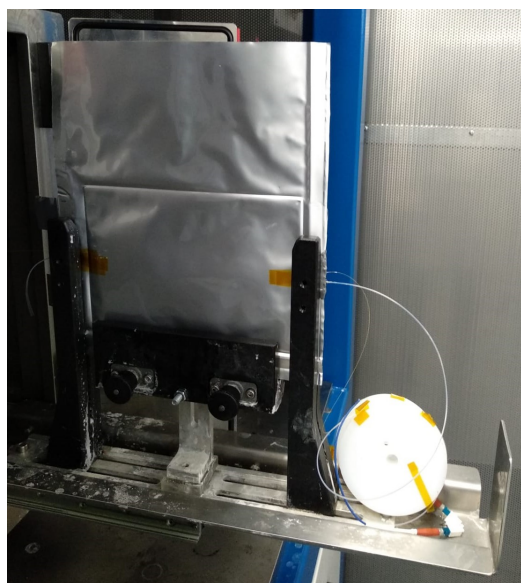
Manufactured instrumented cell with fibre optic sensor after assembly and sealing.
